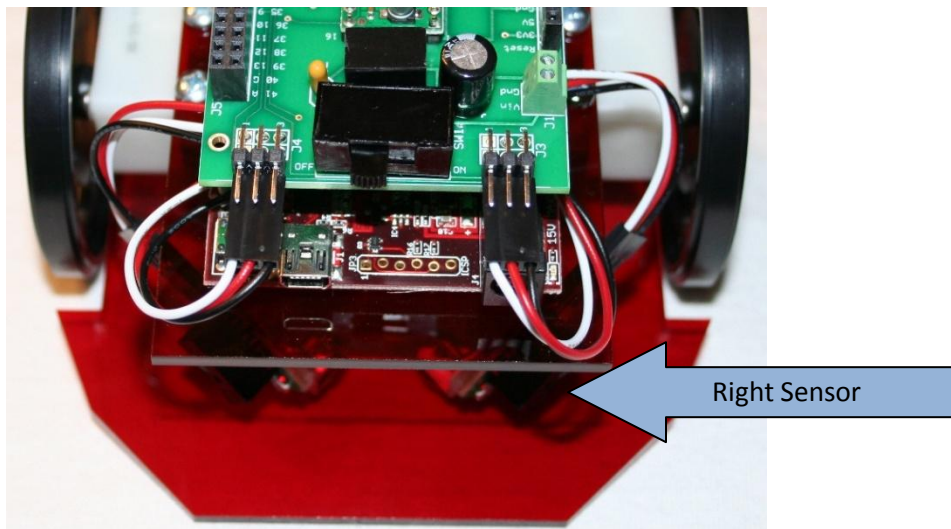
Connect GP2Y0D810Z0F Cables to Motor PCB Headers, J3 & J4.
